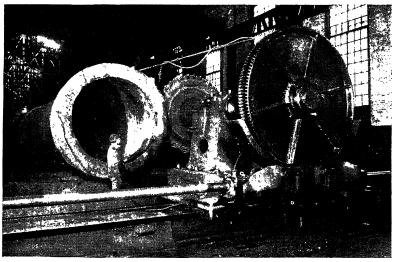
Sawing off end 108-in. reaction chamber. (Bethlehem Steel Co.)
